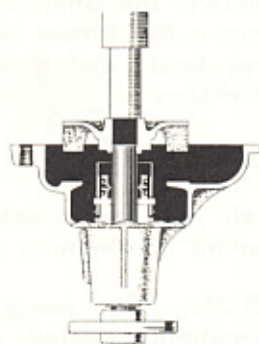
Installing Rotor & Seal onto the Shaft X5051
